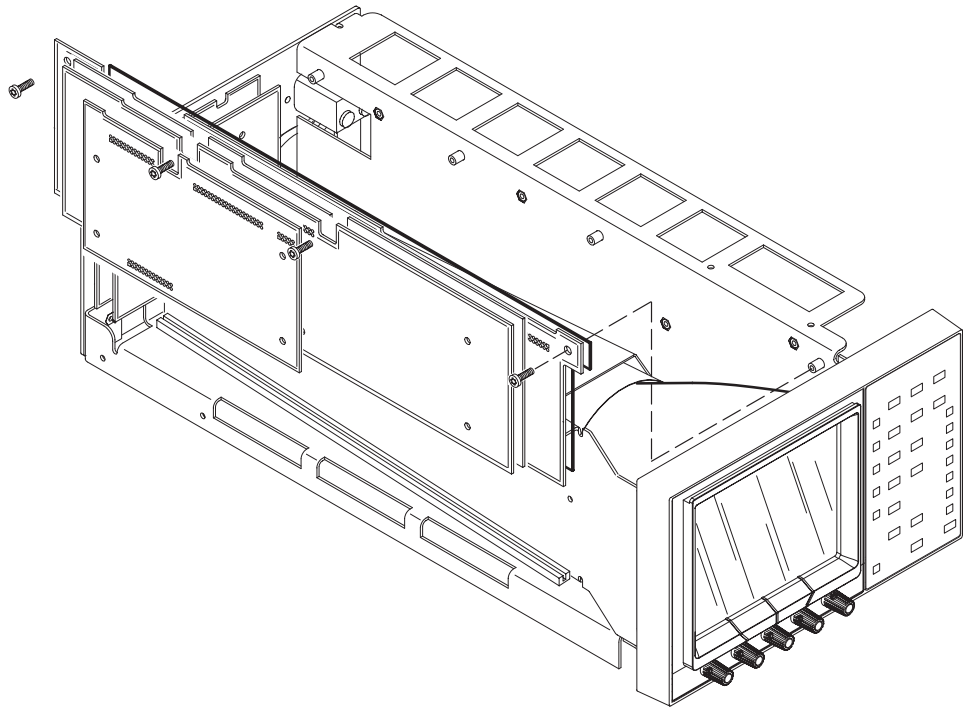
Securing the Component, Coprocessor, and DAC Board
